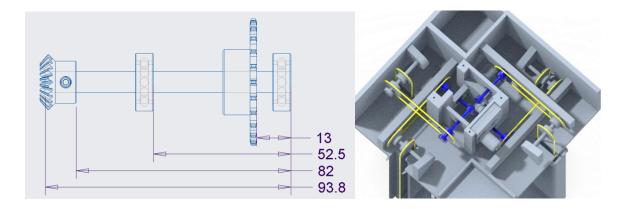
left: Drive shaft drawing (all dimensions in mm) right: Drive shaft placement in shell (blue)
